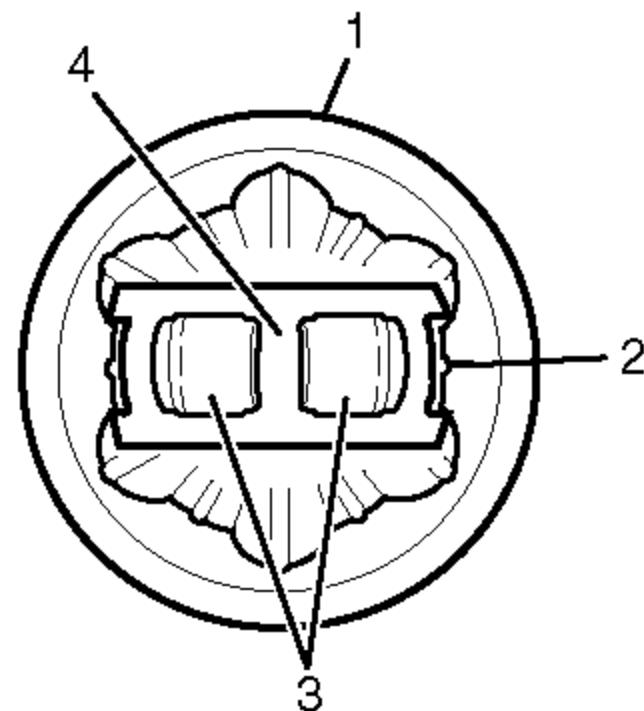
View Of Outer Race, Inner Race, Cage Window & CV Joint Cage
